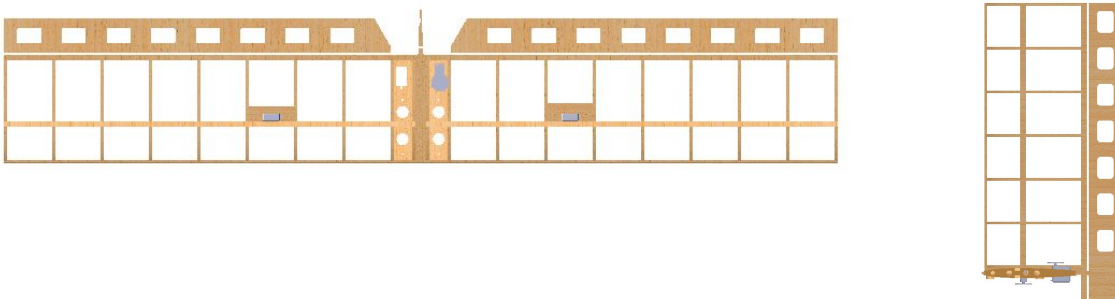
Tail Section Vertical and Horizontal Stabilizer
